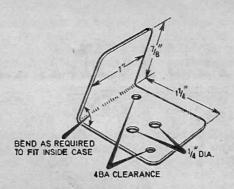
The heat sink used for TR4. The emitter and base pins must not touch the heat sink, which is bent to hold the board firmly inside the case.
